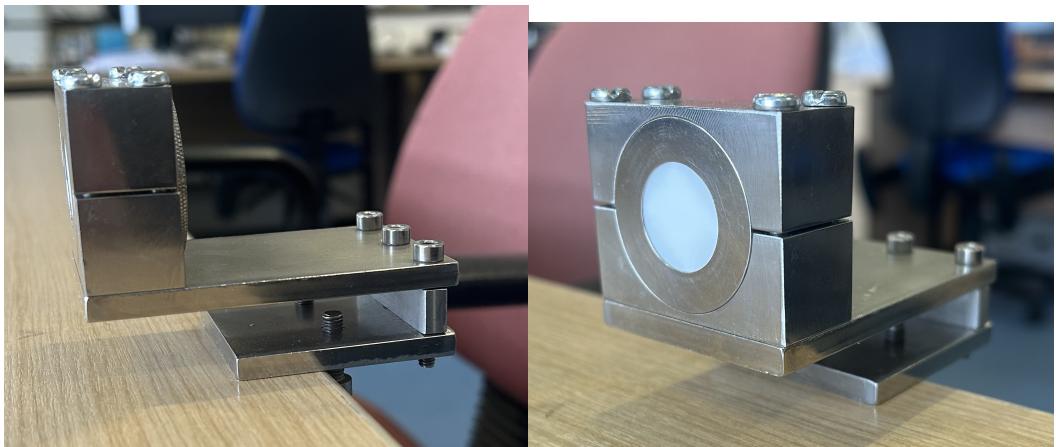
(left) Side view of the prototype holder and (right) front view of the prototype holder.
